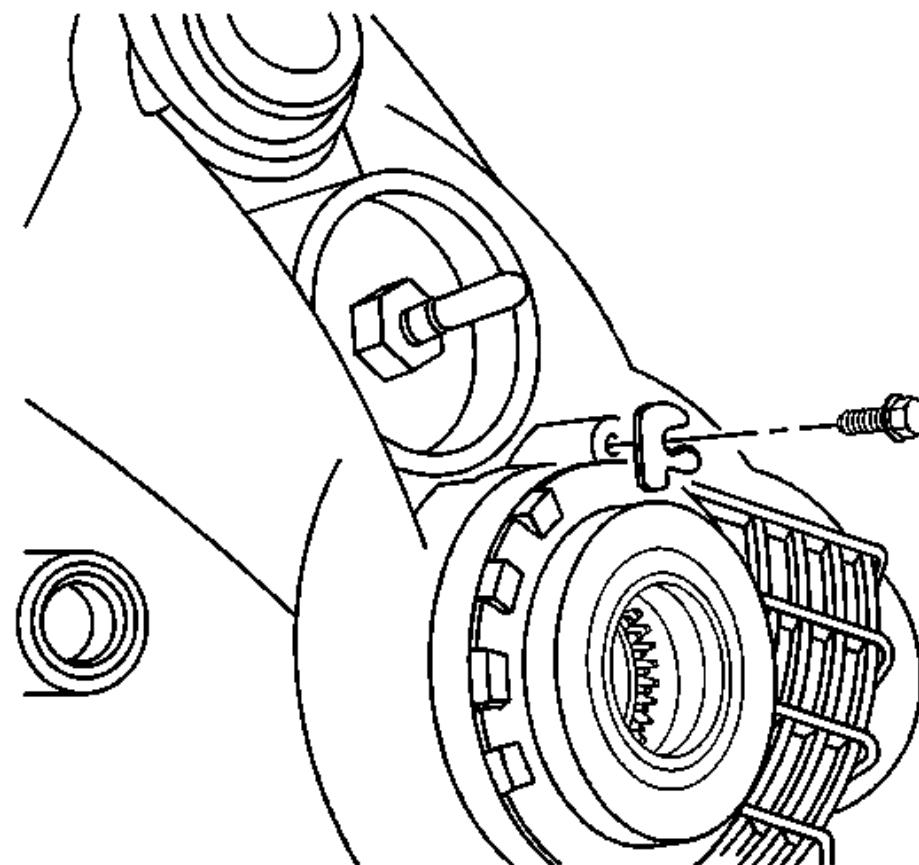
Left Side Differential Bearing Adjuster Nut Lock & Bolt
